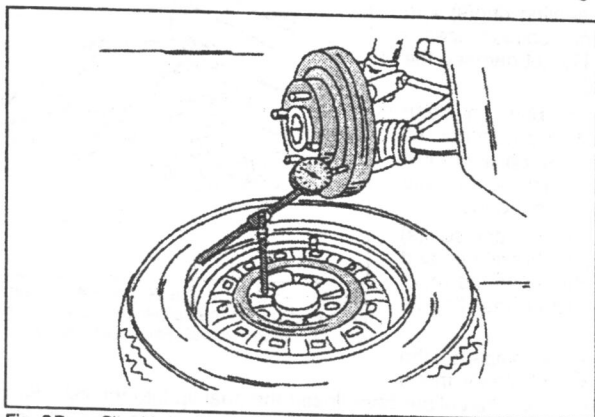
Checking a brake disc for run-out. The wheel can be used to mounting the dial gauge.
